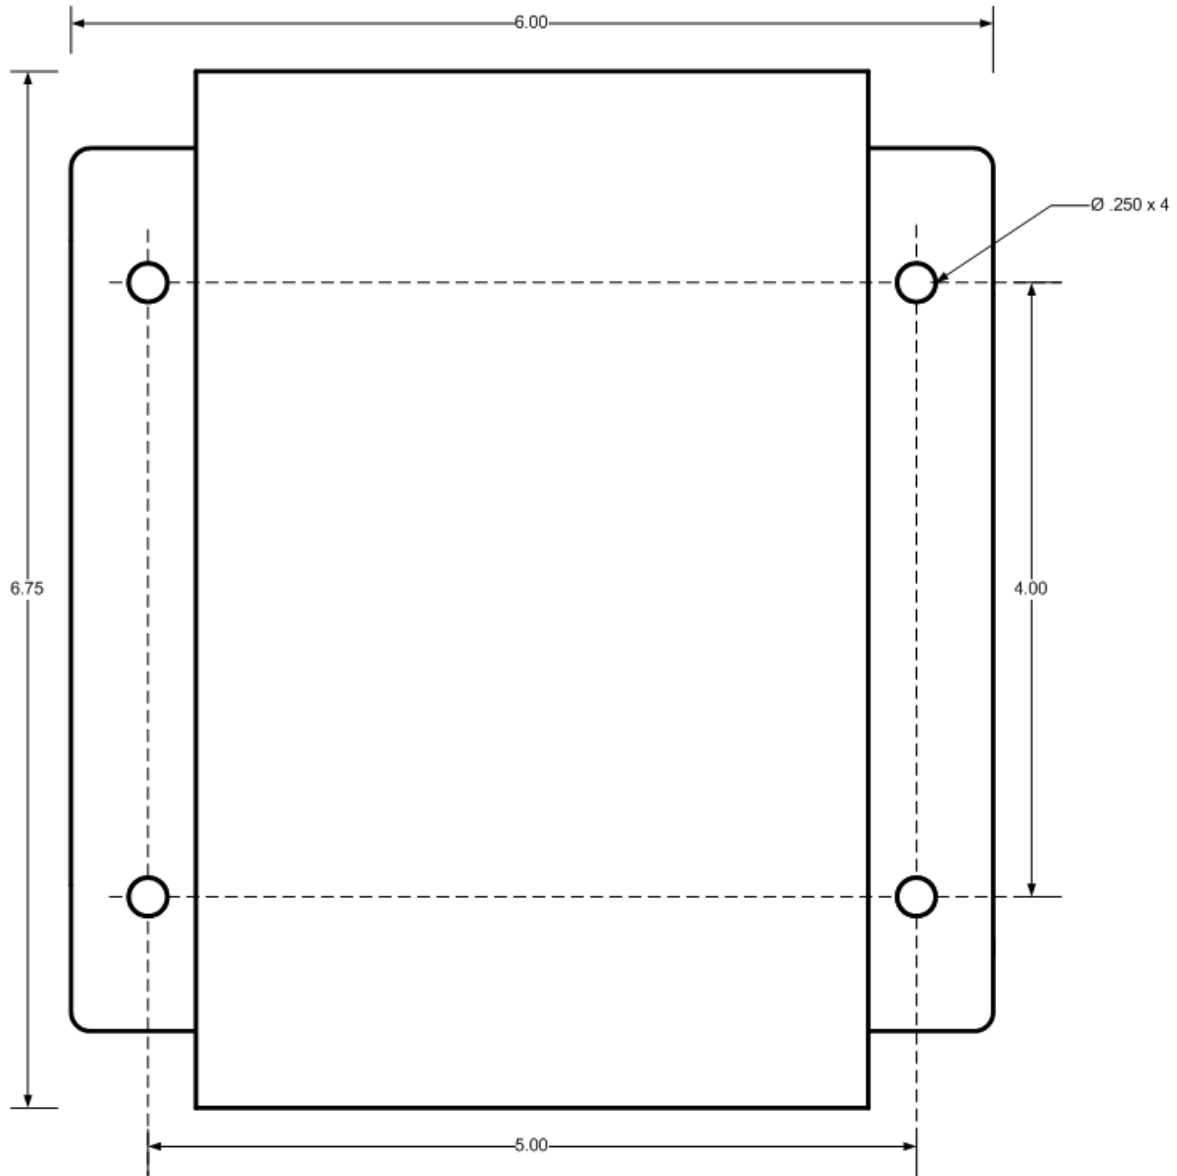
NeXGen™ GCU Baseplate Mounting Detail
